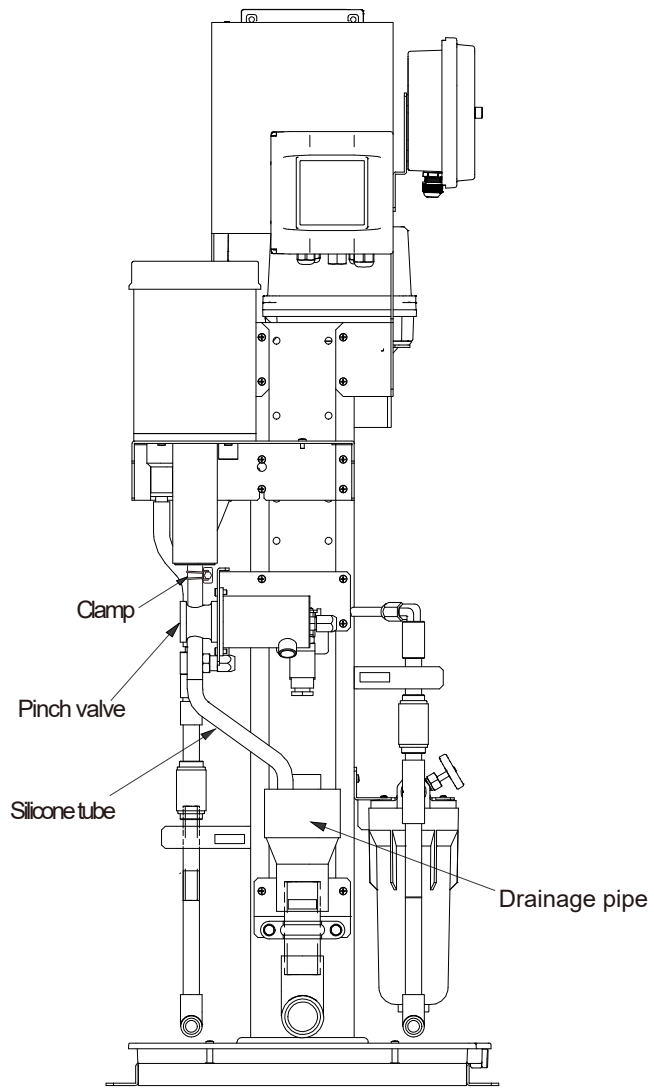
Replacement of Silicone Tube for Pinch Valve
